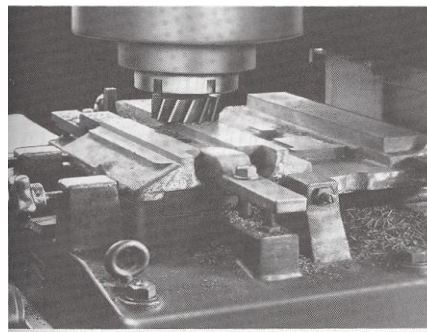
0:30 Face milling a flat surface with a shell end mill.
